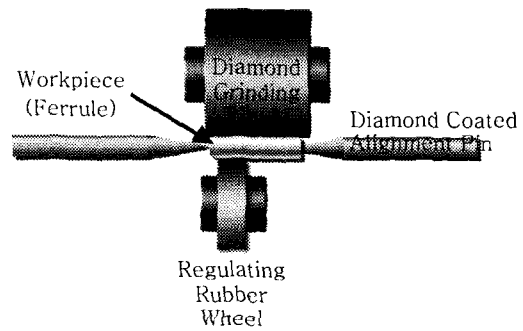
Co-axial grinding of ferrule with cone-type center pins
